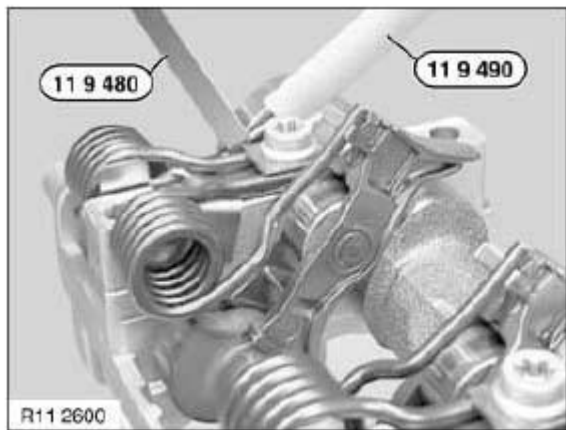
Identifying Special Tool (11 9 480) And (11 9 490)
